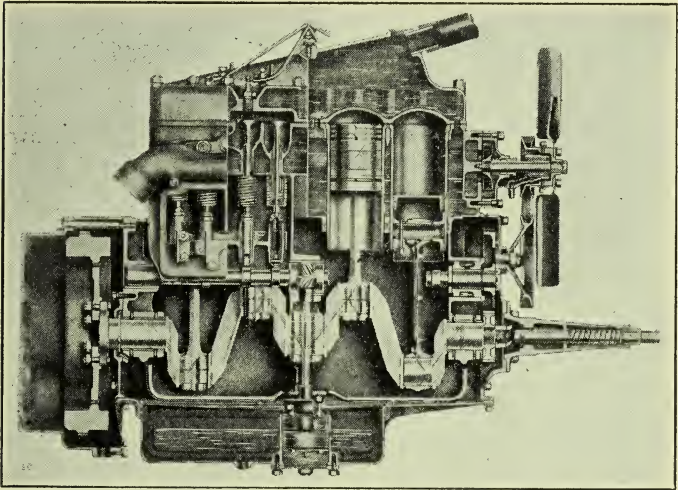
SECTIONAL VIEW SHOWING THE CONSTRUCTION OF THE ENGINE UPON WHICH THE TESTS WERE MADE
